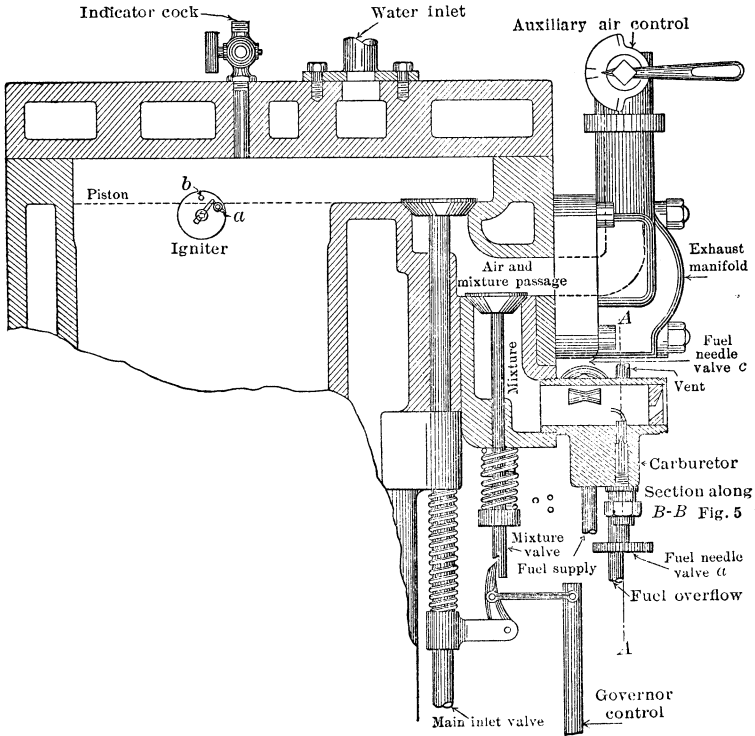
Vertical section through inlet valves and carburetor, Nash engine.
